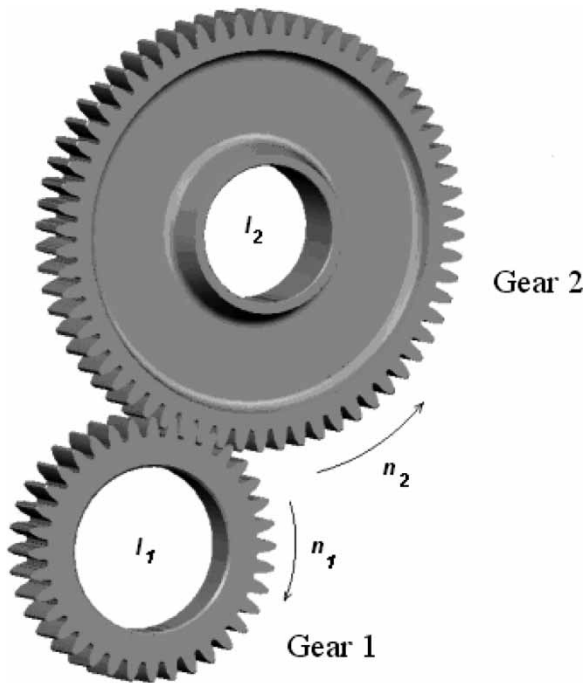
Gear train inertia reduction (gear 1: crankshaft gear)
